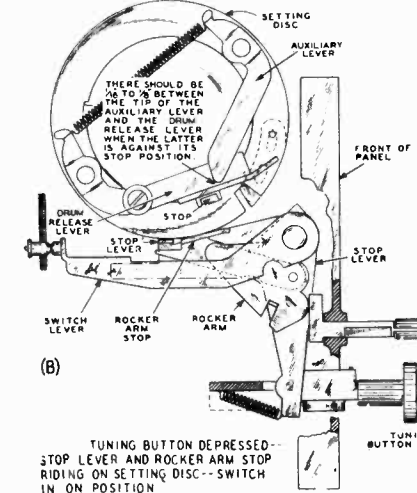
Setting Disc—On Position. Stop Lever on Edge of Disc
